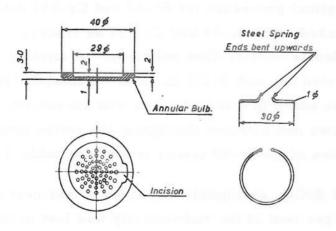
Combined filter and counting disc, all measurements given in millimeters
